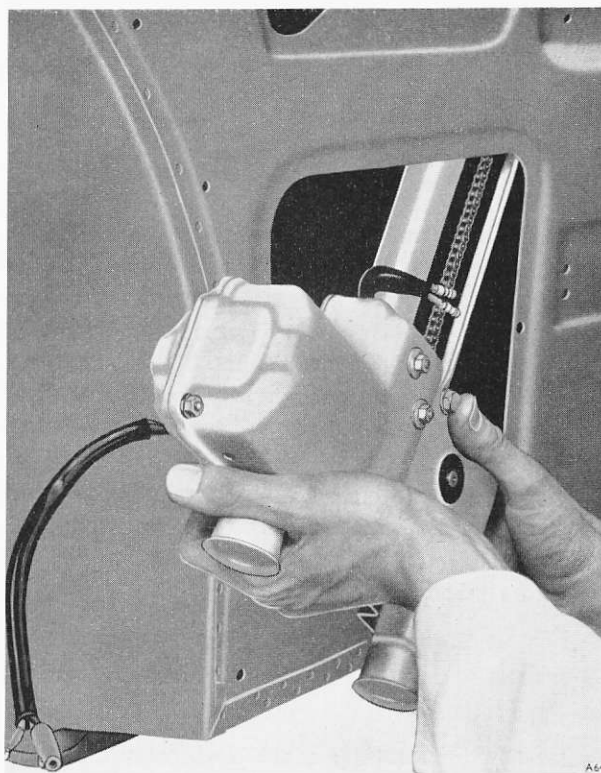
Method of removing the mechanism assembly from the left-hand rear door
